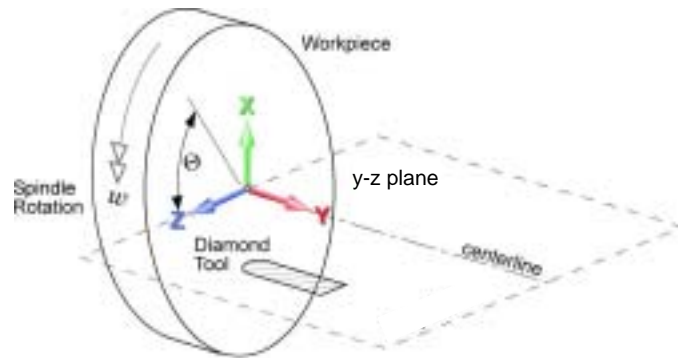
Tool / Workpiece Arrangement on a DTM
